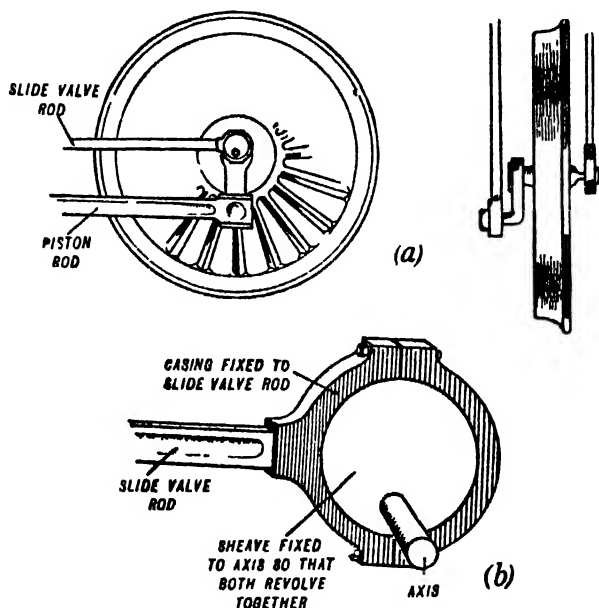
Showing (a) how the piston turns the wheel and (b) how the wheel works the slide valve.
